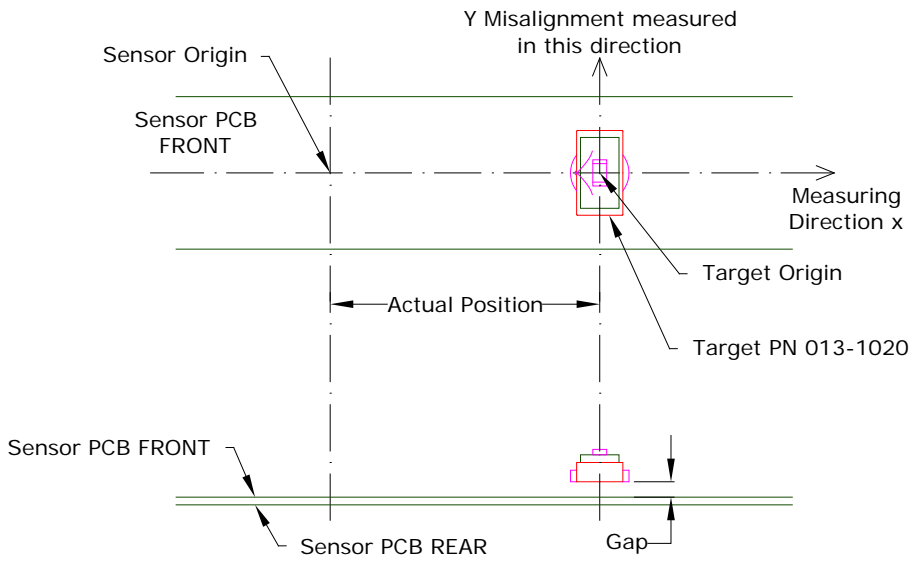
Alignment of sensor PCB 010-0094 with target 013-1020
